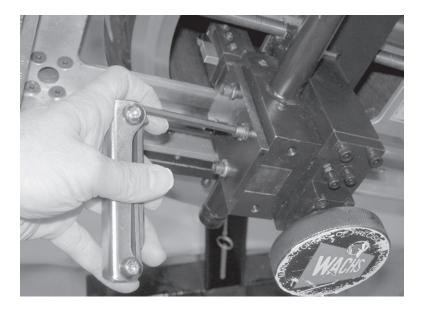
Tighten the screws in the cover to secure the counterbore tool holder in the slide.
